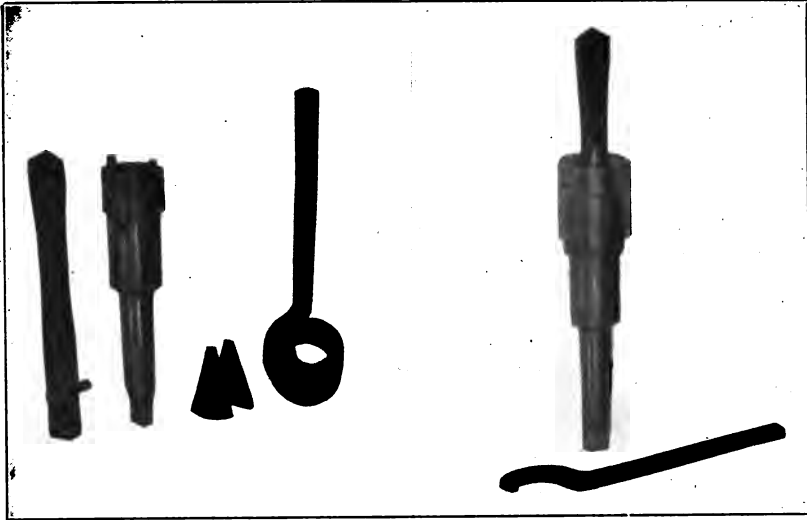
HIGH-SPEED FLAT DRILL, DRILL CHUCK AND PARTS, WITH ASSEMBLED "PHANTOM" VIEW, SHOWING THE DRILL IN THE CHUCK READY FOR SERVICE. THIS DRILL IS MADE FROM PLAIN FLAT BAR TOOL-STEEL, IS MUCH CHEAPER TO MANUFACTURE THAN THE TWIST DRILL, AND IS NEARLY AS EFFICIENT AT HIGH SPEEDS.
